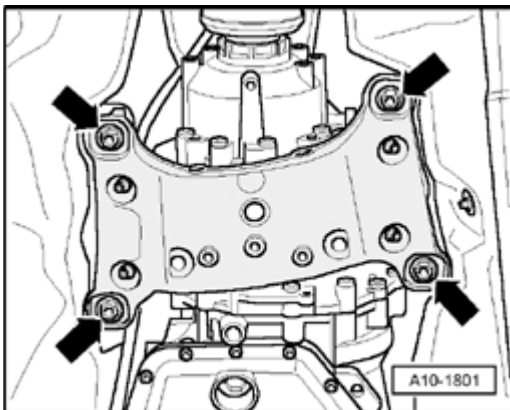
Removing/Installing Bolts At Tunnel Cross Member
